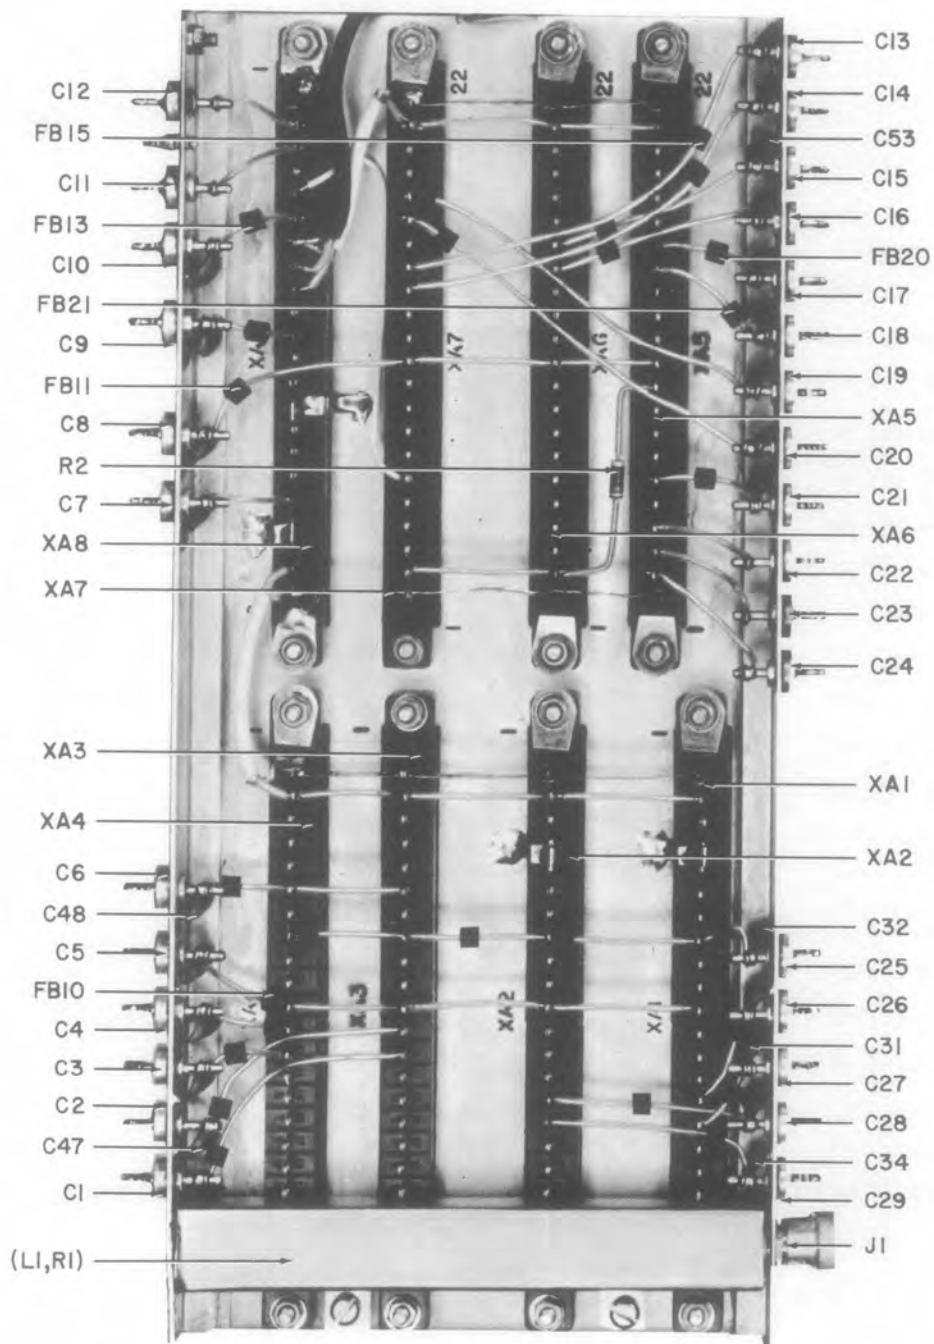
Type 72311 IF Amplifier Assembly (A2), Bottom View, Location of Components
